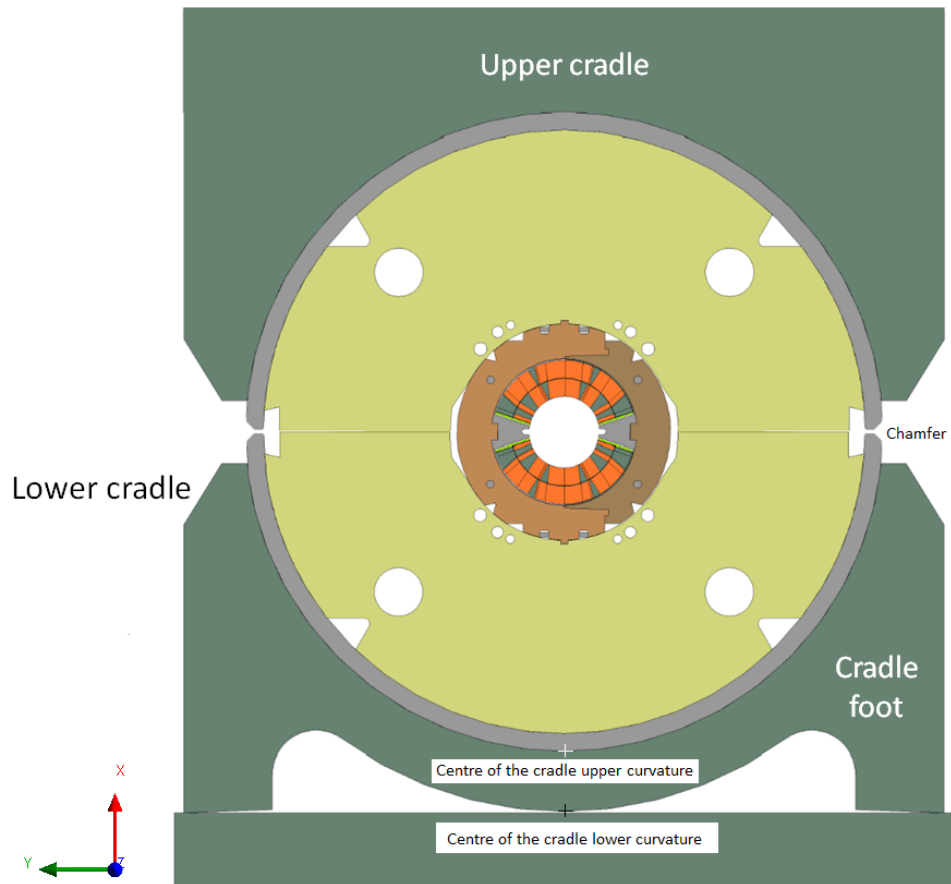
A Cradle assembly and single aperture 11-T dipole magnet (1-in-1) intersection. The magnet halves have been turned 90° clockwise from Figure 2.2 for the welding position. [26]
